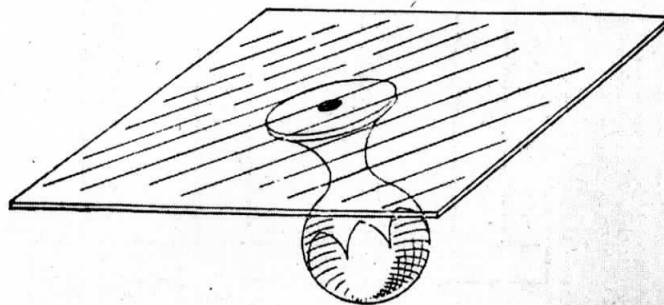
PNEUMATIC HOLDER AND GLASS PLATE.
